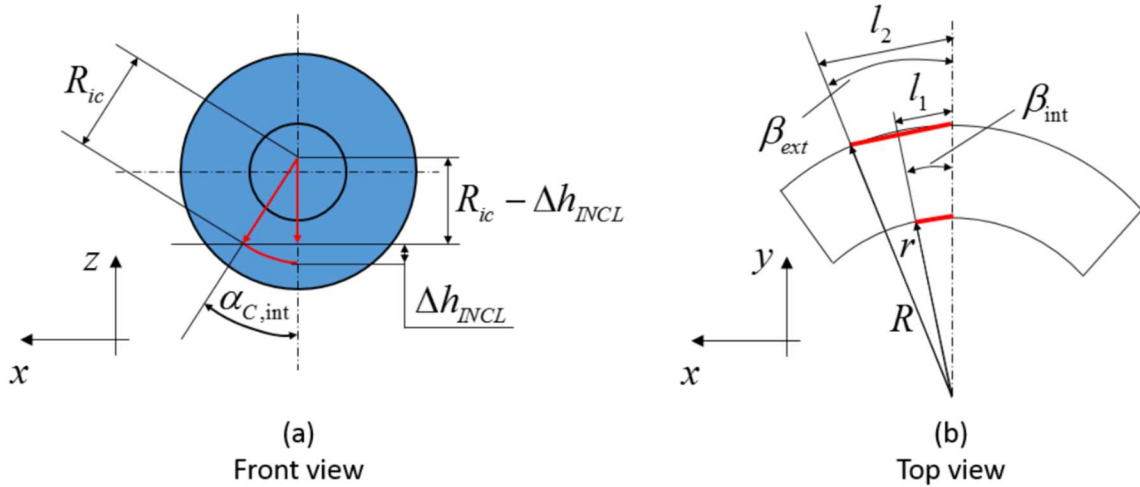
Contact geometry in the axial rolls gap, (a) front view and (b) top view.
